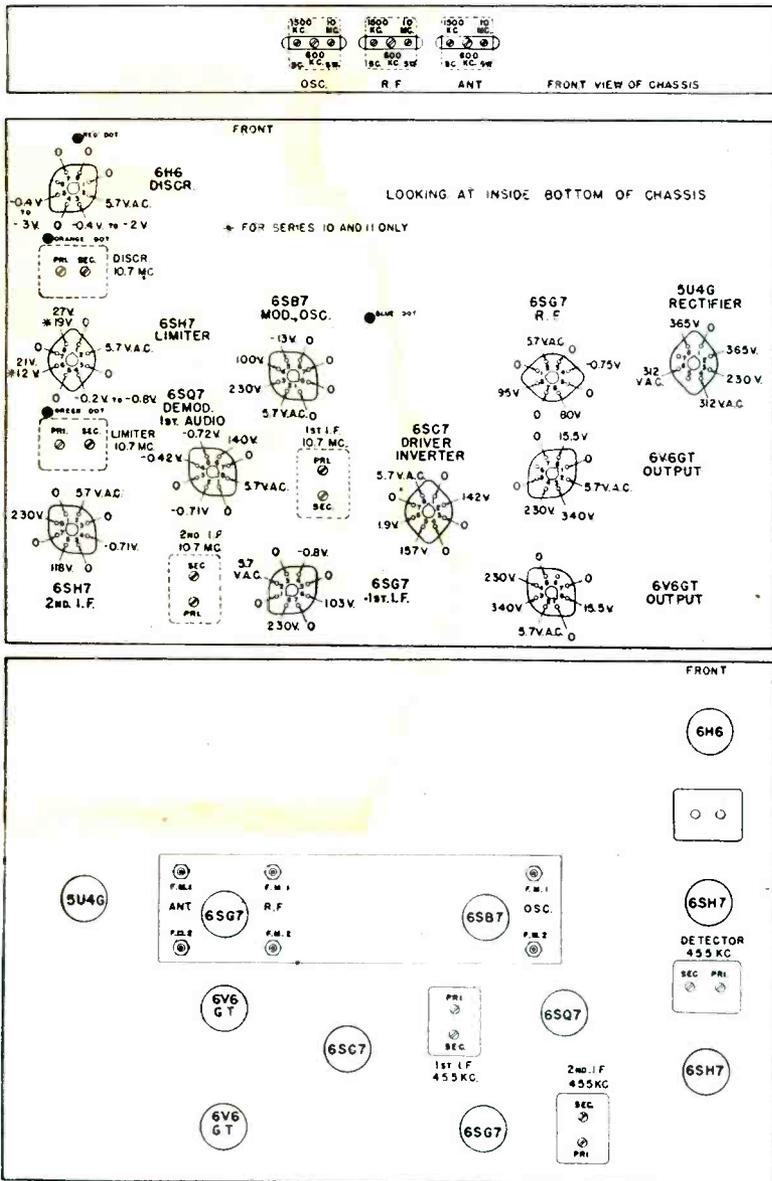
At top appears front view of chassis showing the oscillator, r-f and antenna alignment adjustments. In center appears the tube layout and voltage data. At bottom, we have a top view showing tube layout and trimmers.
